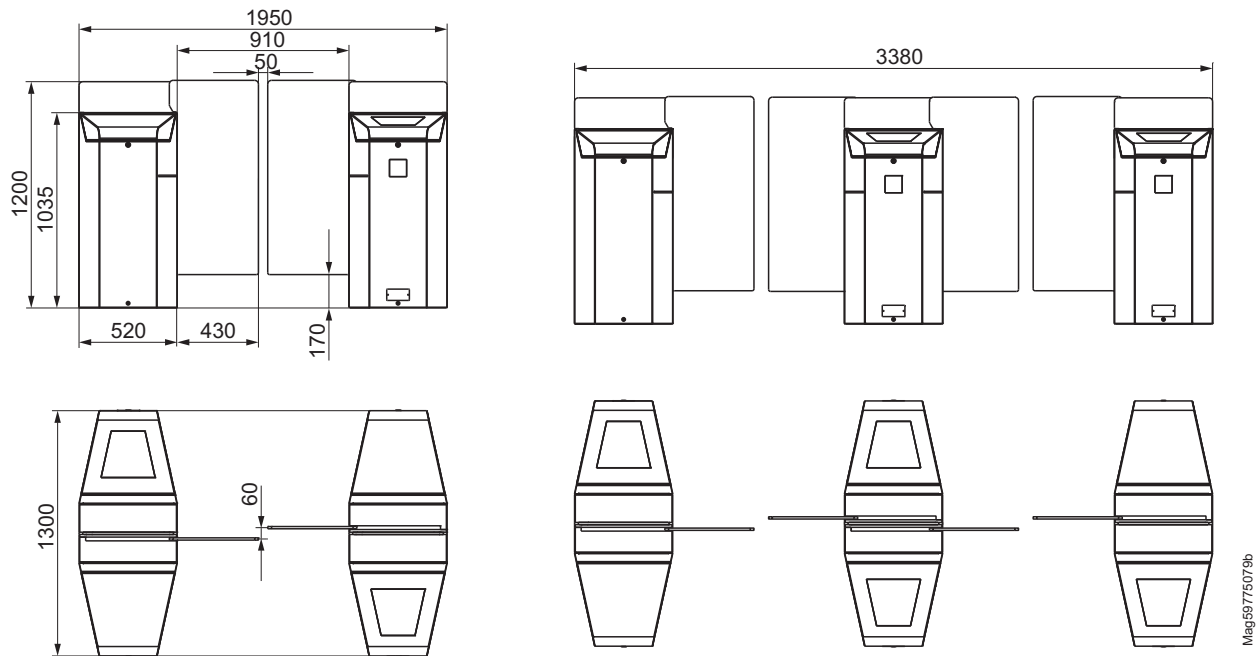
Dimensions – Housing width 520 mm (Wide)
